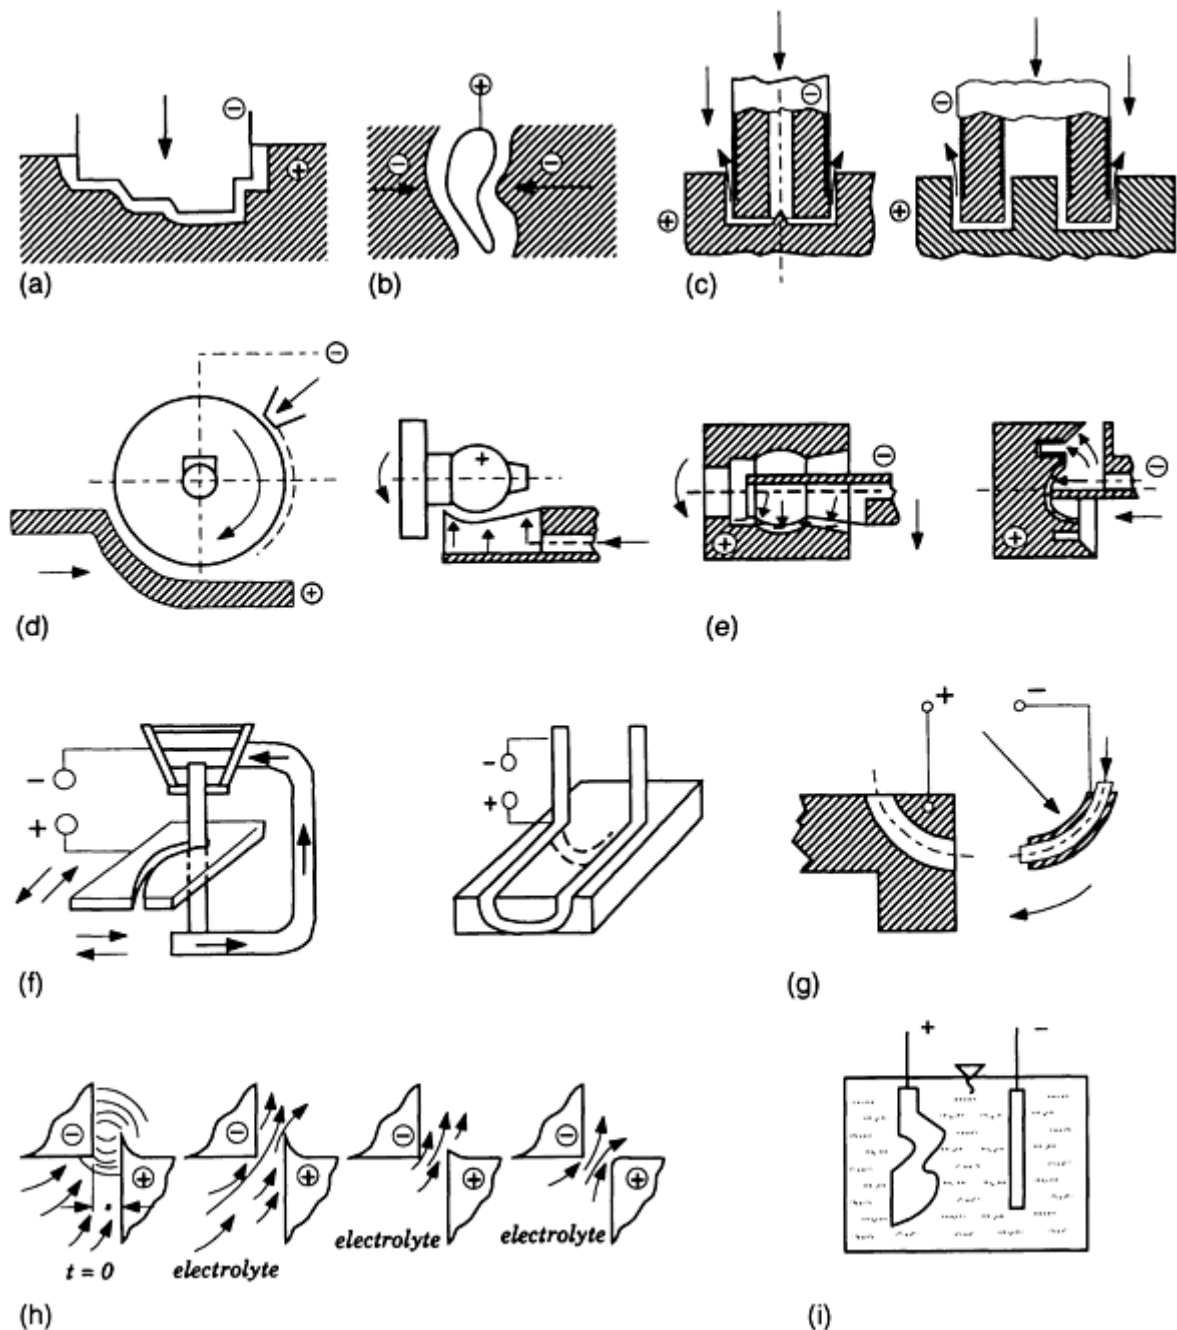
Schematics of electrochemical machining (ECM) operations. (a) Die sinking. (b) Shaping of blades. (c) Drilling. (d) Milling. (e) Turning. (f) Wire ECM. (g) Drilling of curvilinear holes. (h) Deburring and radiusing. (i) Electropolishing
